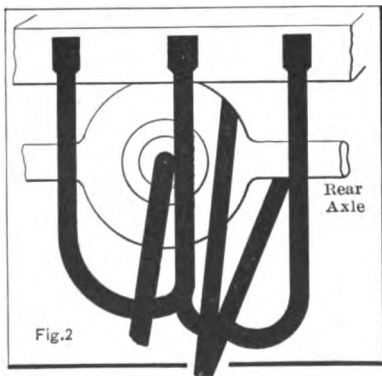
Support to prevent propeller shaft and torque rod from dropping
